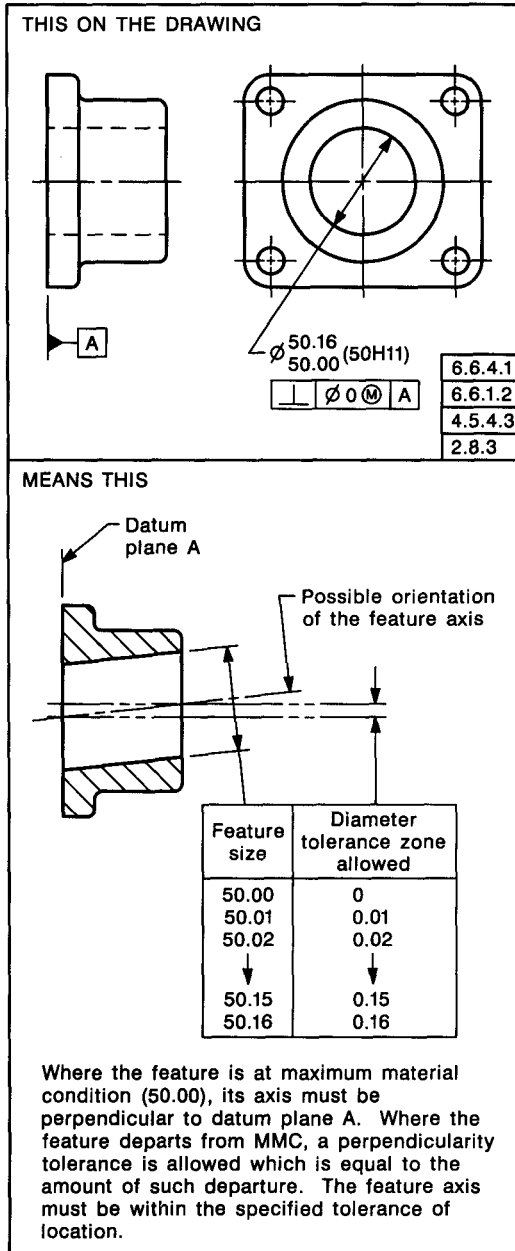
SPECIFYING PERPENDICULARITY FOR AN AXIS (ZERO TOLERANCE AT MMC)
